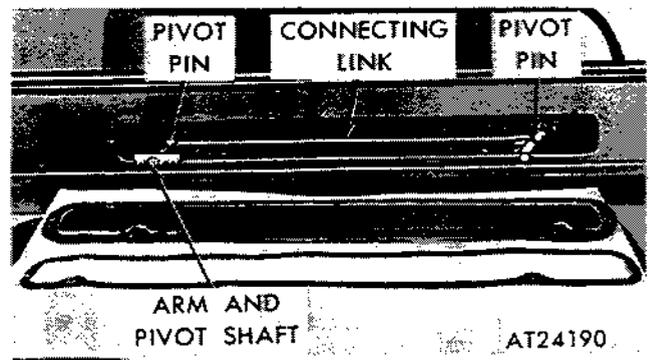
Removing or installing windshield wiper pivot shaft and connecting link (M151A2, M825, and M718A1 vehicles).
